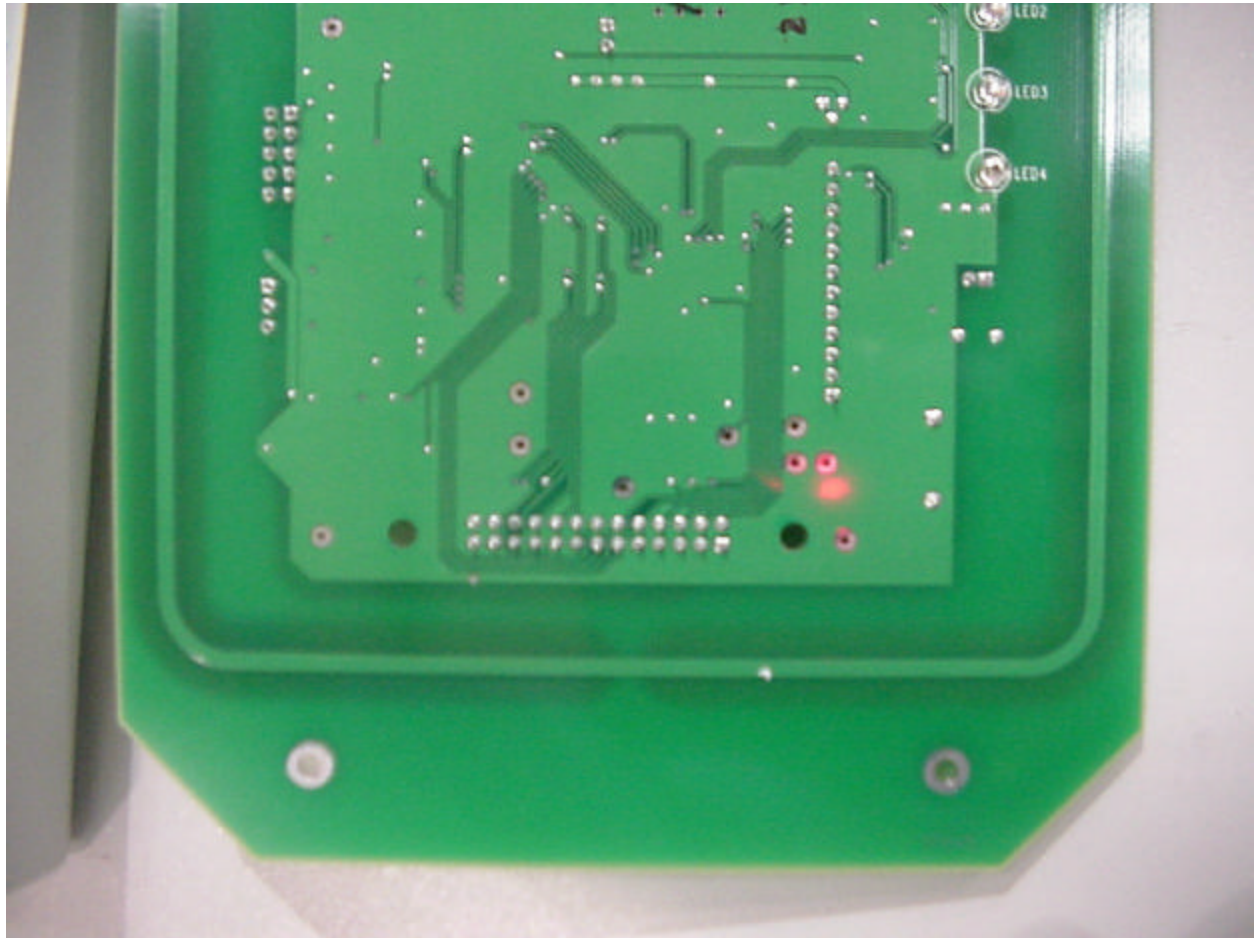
Photo of the Bottom for Side 2 of the Circuit Board
